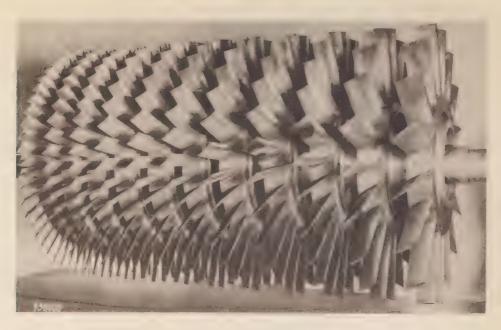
The compressor spindle of the Westinghouse J34 turbojet.
